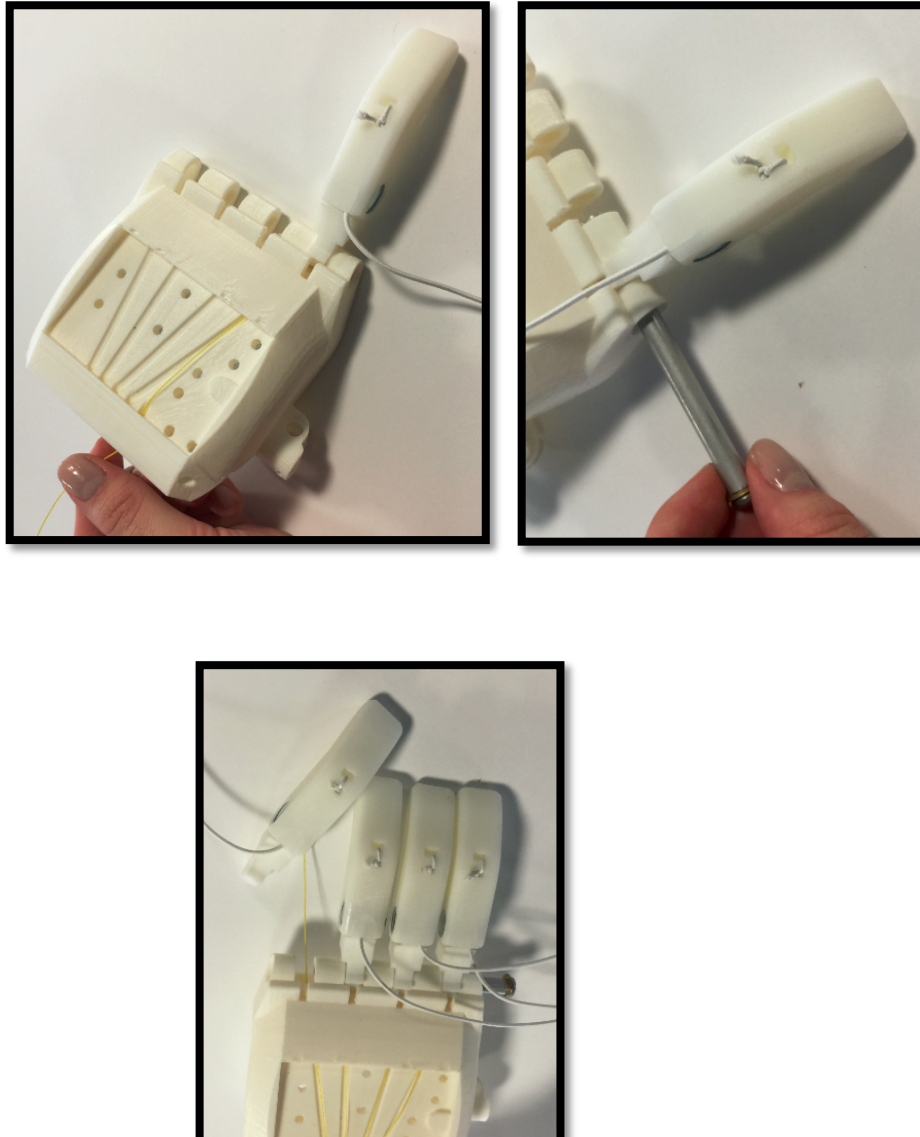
Connecting the fingers to the palm by inserting the base rod through the holes in the palm and finger base joint one by one.
